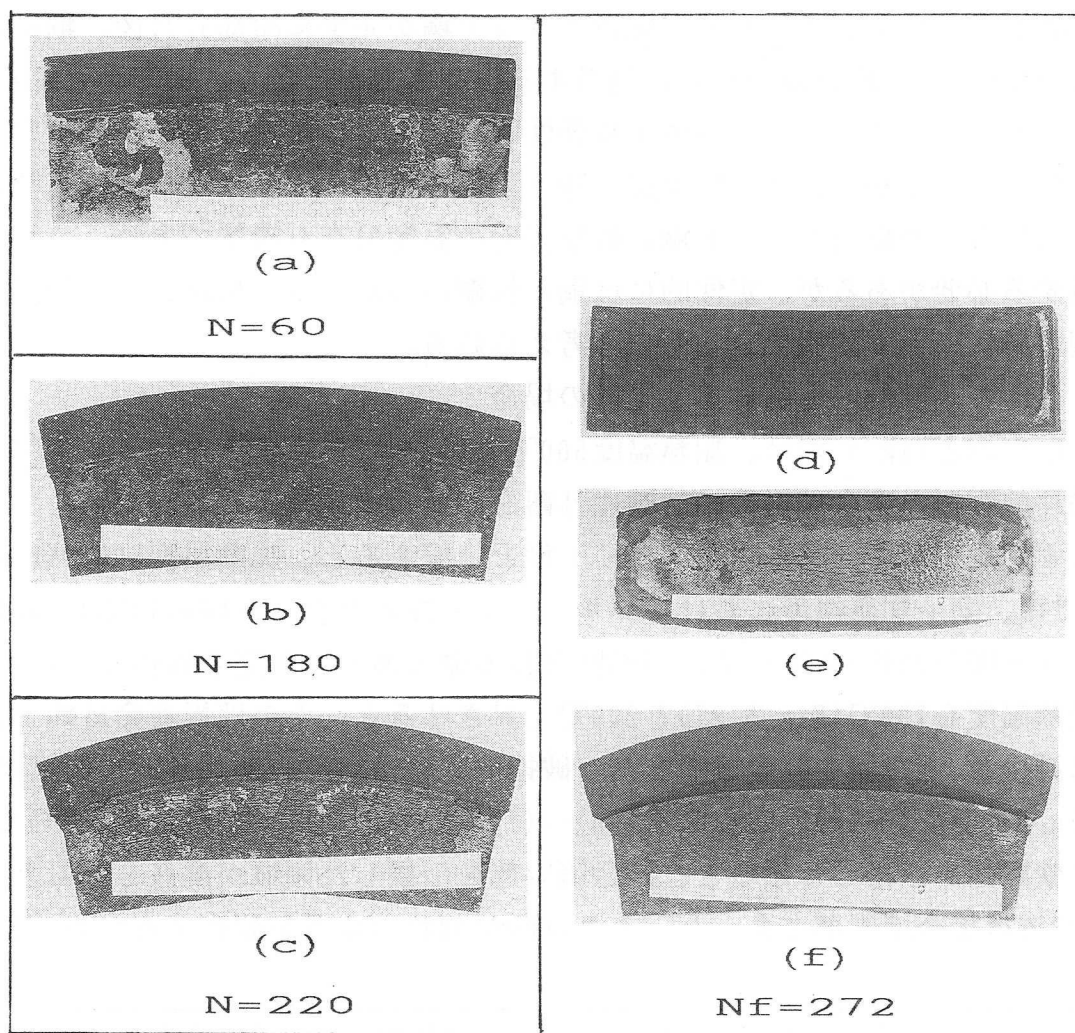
Deformation of SUS304 explosive clad steel after thermal cycling(700°C)[(a), (b), (c), (f) longitudinal side;(d) failure surface(SUS304);(e) failure surface(carbon steel)]
